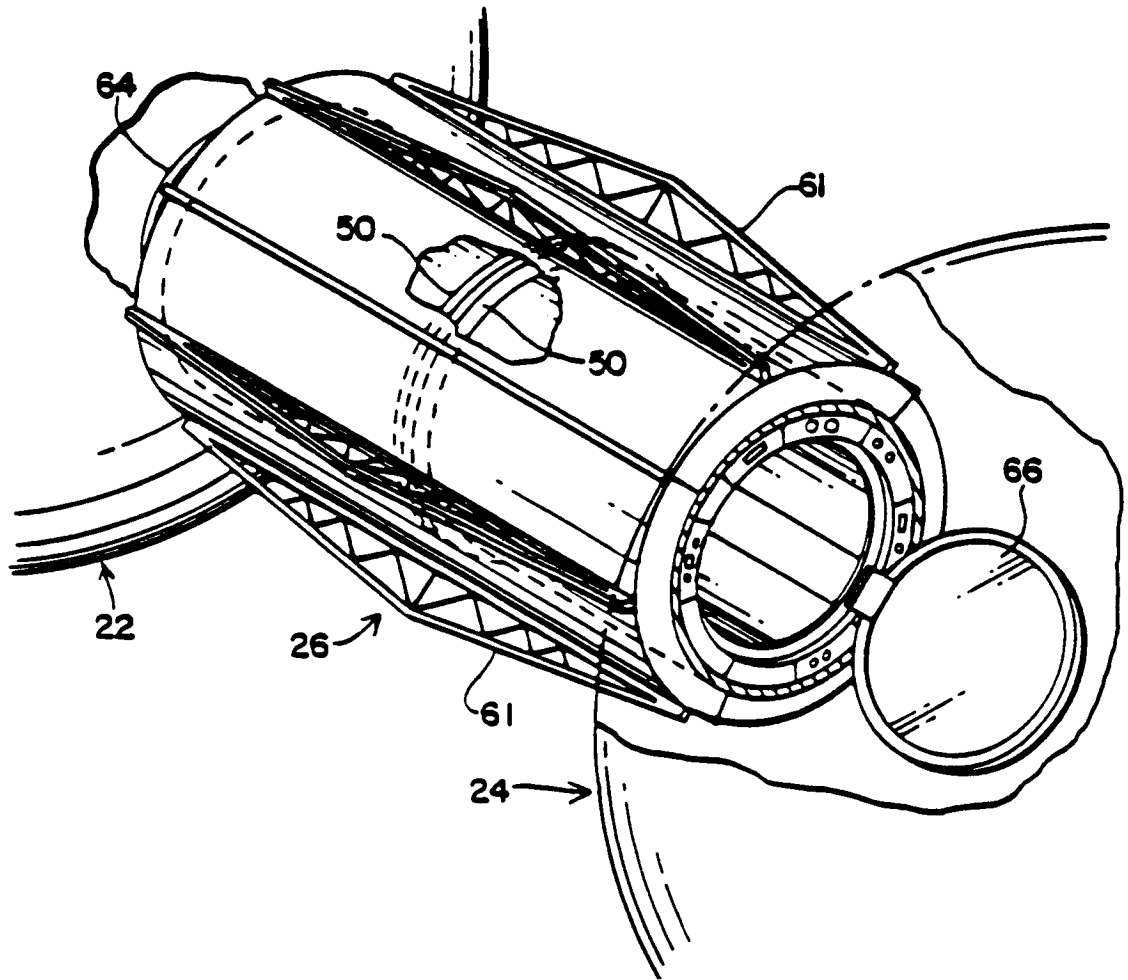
Patent drawing detail of modules to hub connecting joint mechanism.
